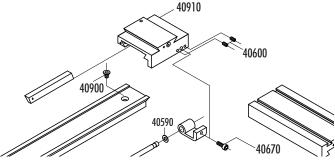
Exploded view of the lathe saddle and saddle nut.
